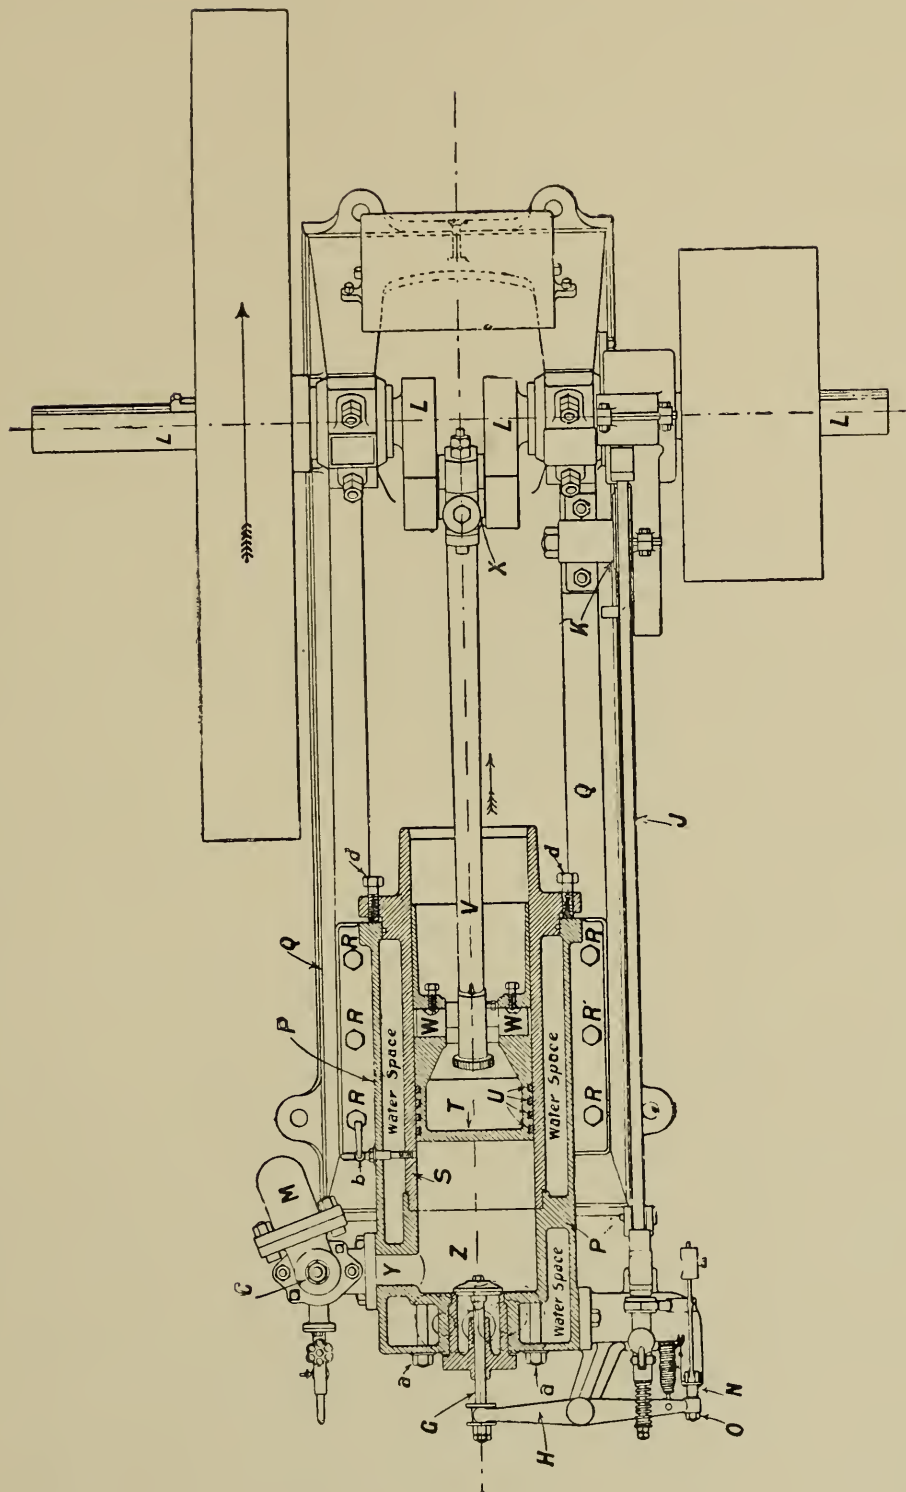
Sectional Plan through cylinder of Campbell Oil Engine.
